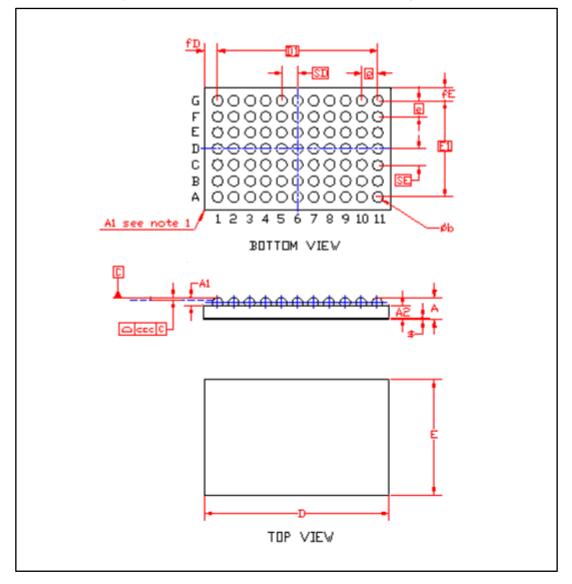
Flip Chip 77 bumps (3.12x4.73 mm) package outline
